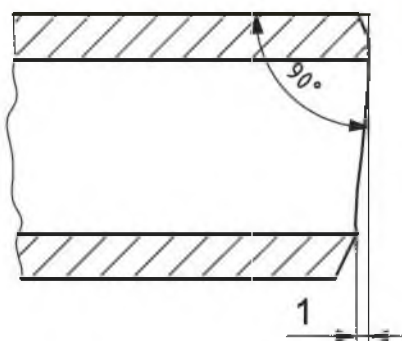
Measuring end straightness9.12 Finish of pipe ends9.12.1 General
